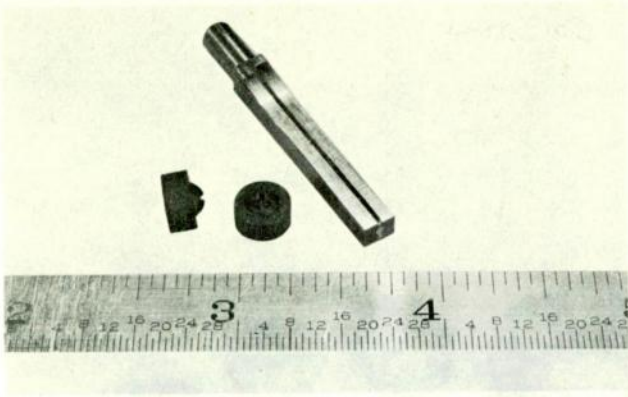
Carbide spray nozzle and "V" notch cutting tool. Tool shown before mounting to ultrasonic toolholder.
